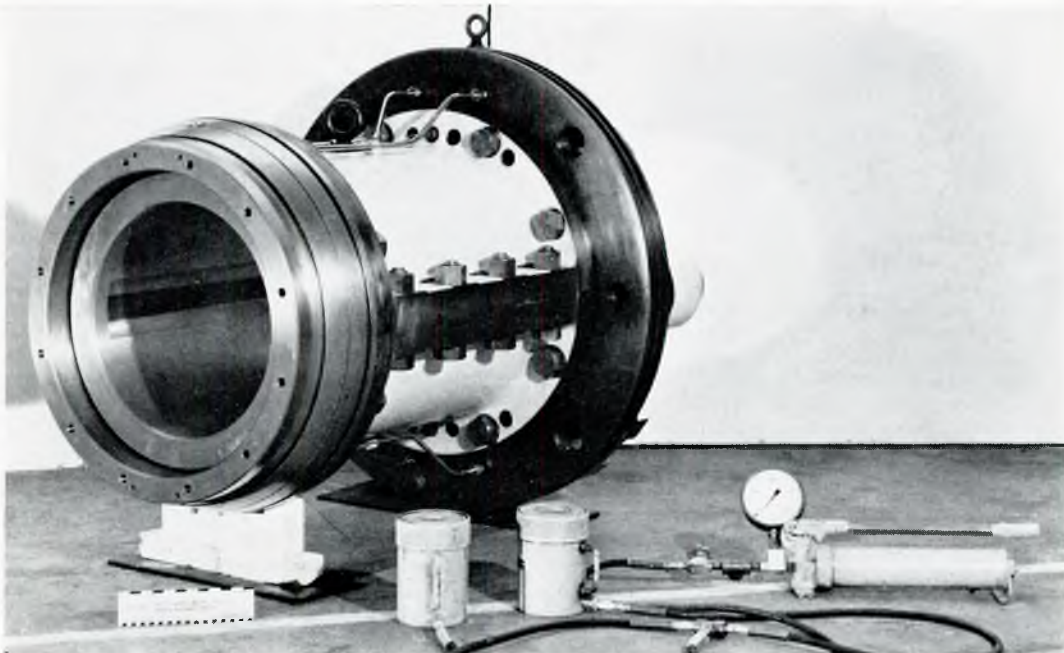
Stern bearing assembly in works looking on aft end—the two jacks used for installation and withdrawal are shown
